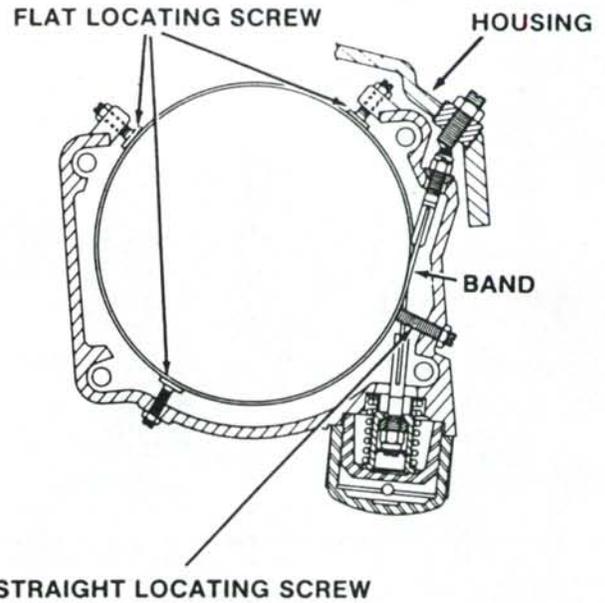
View of rear planetary brake band and housing showing location of the four locating screws.
